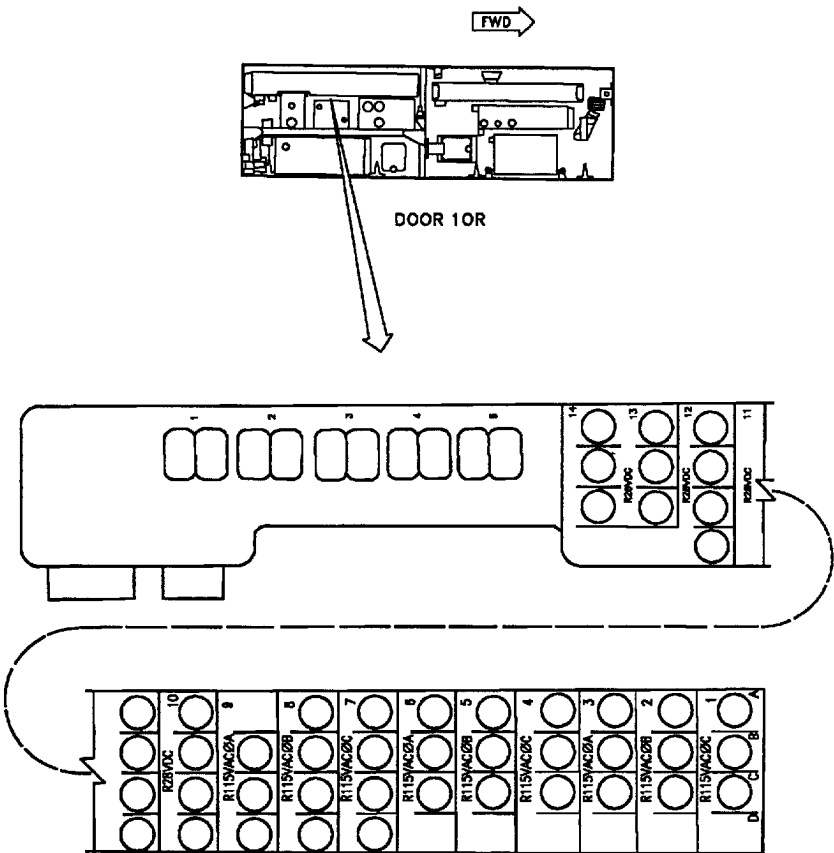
No. 2 Circuit Breaker Panel Assembly (52A-D024) -161360 and up (Sheet 2)
